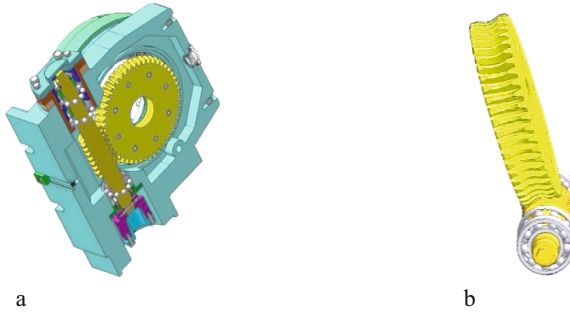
3D models of the worm gearing: a – worm drive section; b – worm engagement
